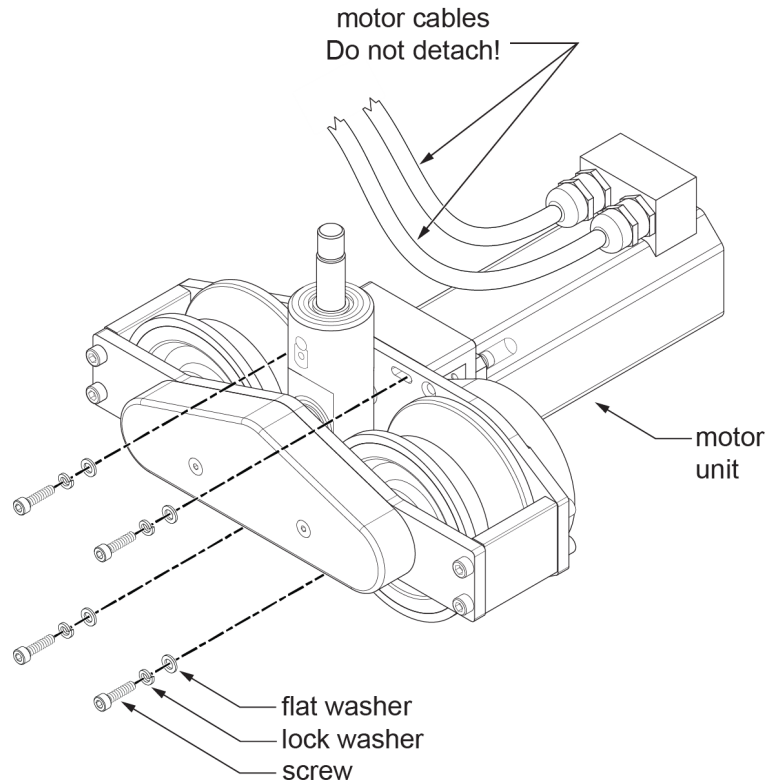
Removing the Motor Unit from the Drive Wheel Unit
